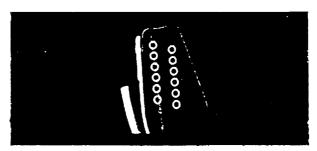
Enlarged Image of CT Scan Through Critical Weld Joint Area
